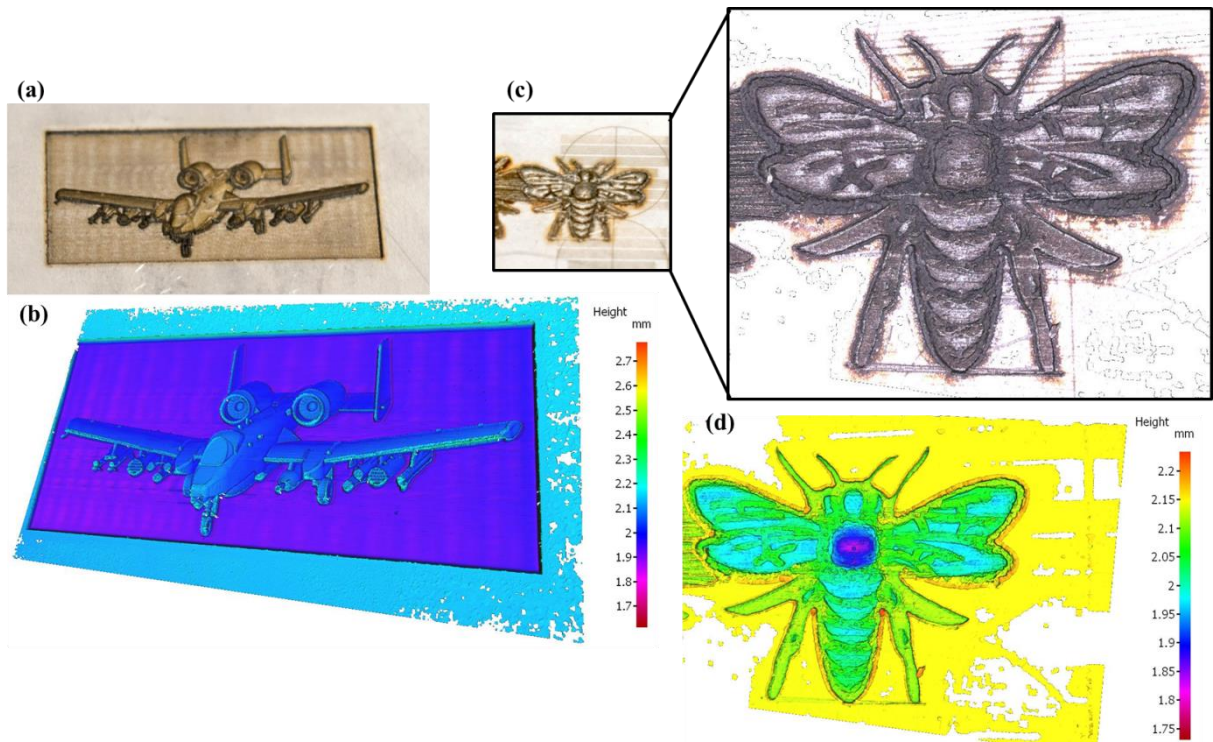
More machining examples to demonstrate the capabilities of the adaptive postprocessor: (a) a photograph of a laser produced 3D geometry; (b) a pseudo-colour representation of the laser produced 3D geometry shown in (a); (c) a photograph of a laser produced 3D geometry; (d) a pseudo-colour representation of the laser produced 3D geometry shown in (c)
